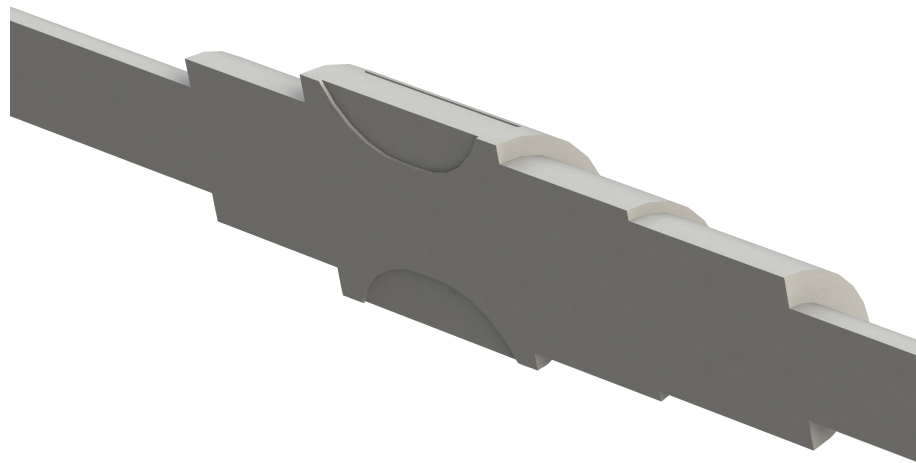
Test rig rotor with replaceable lamination sleeves
